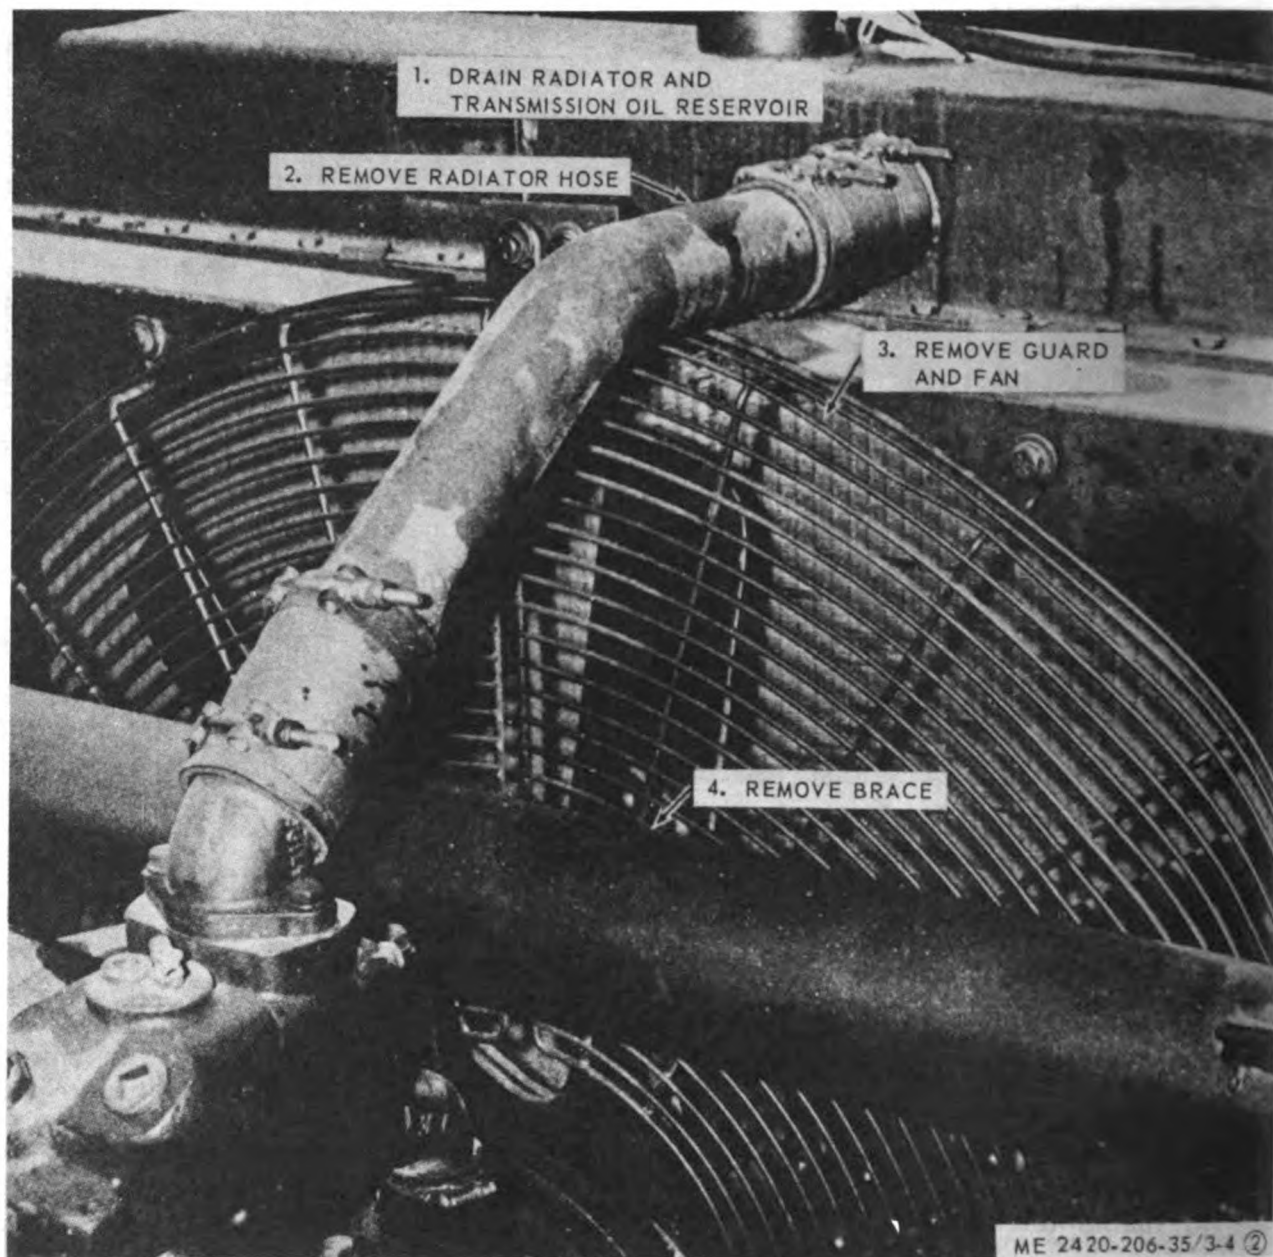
Radiator, removal and installation (sheet 2 of 3).
